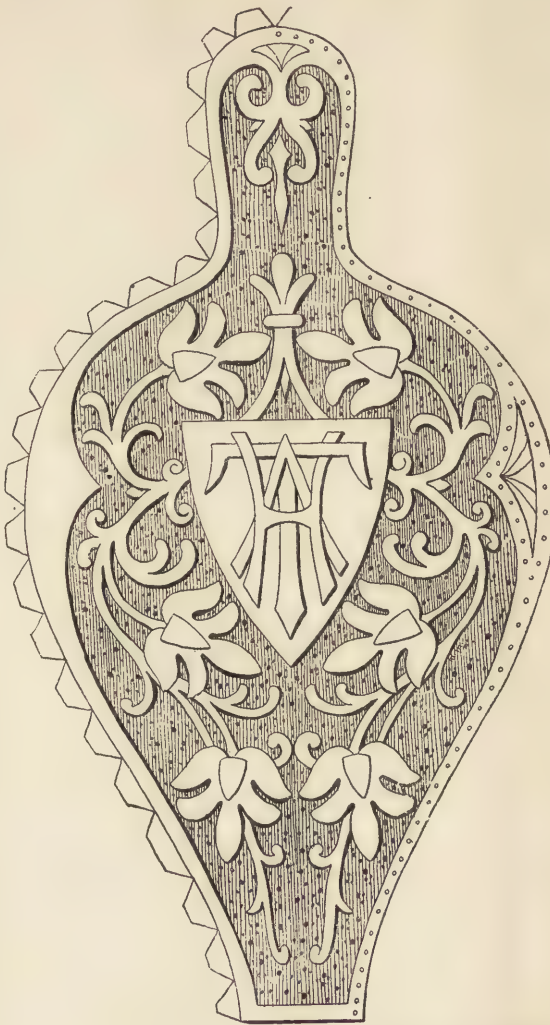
REPOUSSÉ BELLOWS MOUNT, READY FOR FINISHING.
